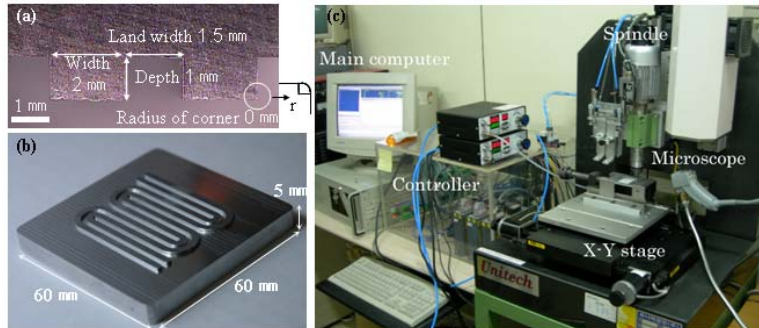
(a) Selected channel parameters of the mold by DOE (b) machined aluminum mold for compression molding, and (c) 3-axis stage for machining
